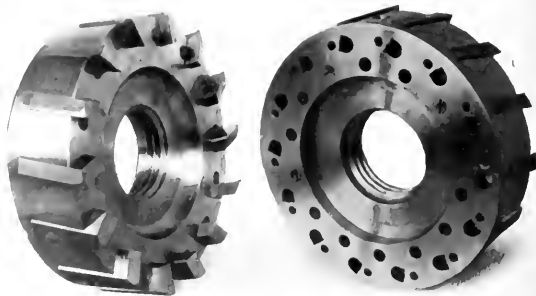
Opposite Sides of the Becker Inserted-tooth Milling Cutter
